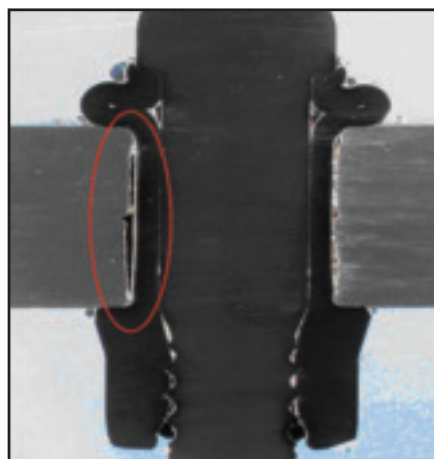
Cross section of a blind rivet made between sheet materials. Figure from Ref. 44.
